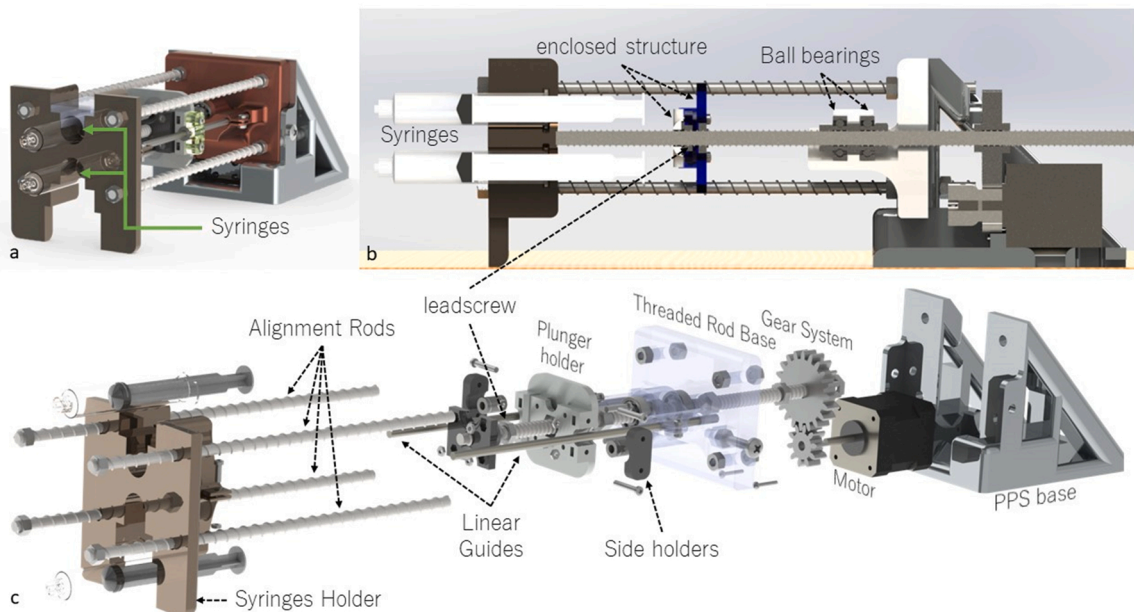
a) CAD design of the assembled PPS system. b) Cross Section view of the PPS system. c) Exploded view of the PPS system.
